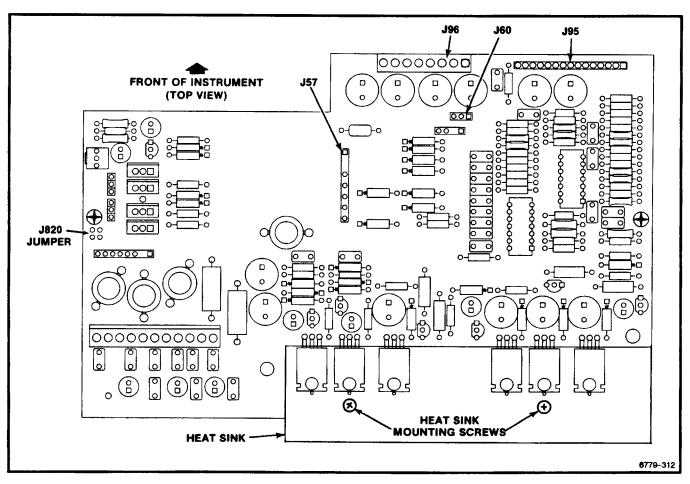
Connector locations for removal of the A4 Regulator board.
